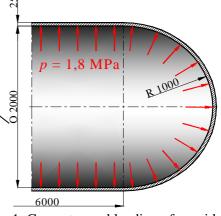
Geometry and loading of considered cylindrical pressure vessel with hemispherical heads
